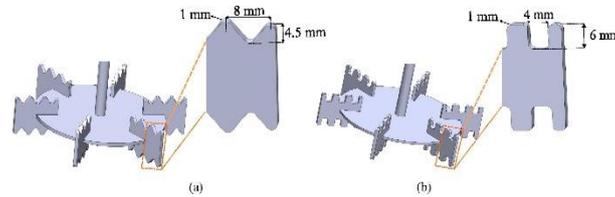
Geometries of different radial impellers: (a) V-shape and (b) U-shape impellers (Hoseini et al., 2021).
